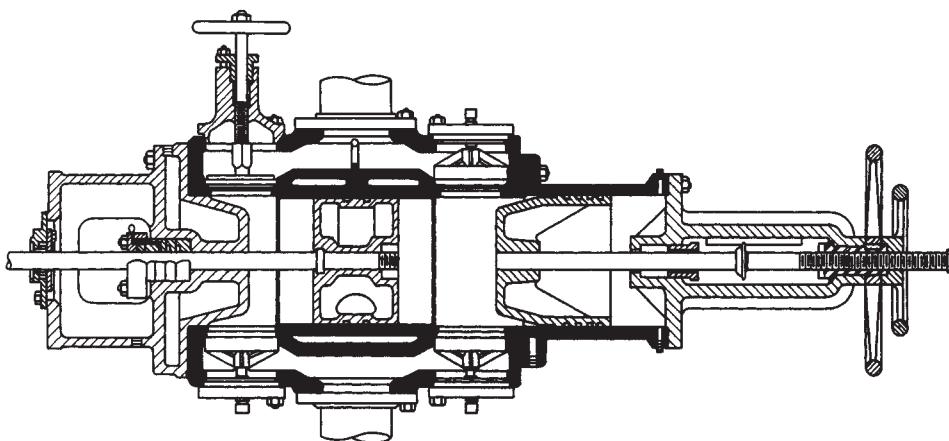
Sectional view of a cylinder equipped with a hand-operated valve lifter on one end and a variable-volume clearance pocket at other end.
